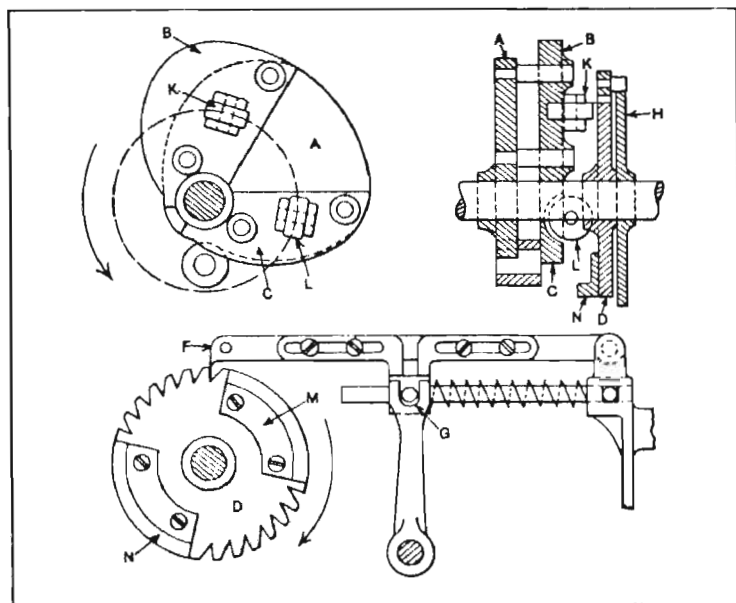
Cam equipped with Mechanism for Varying Rise and Drop According to Predetermined Pressure on Another Part of the Machine
